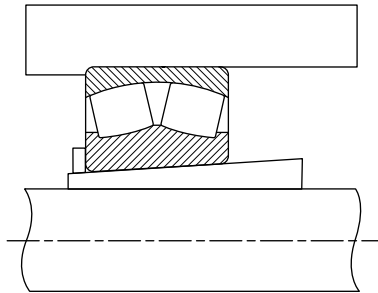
Spherical roller bearing mounted with an adapter sleeve.
